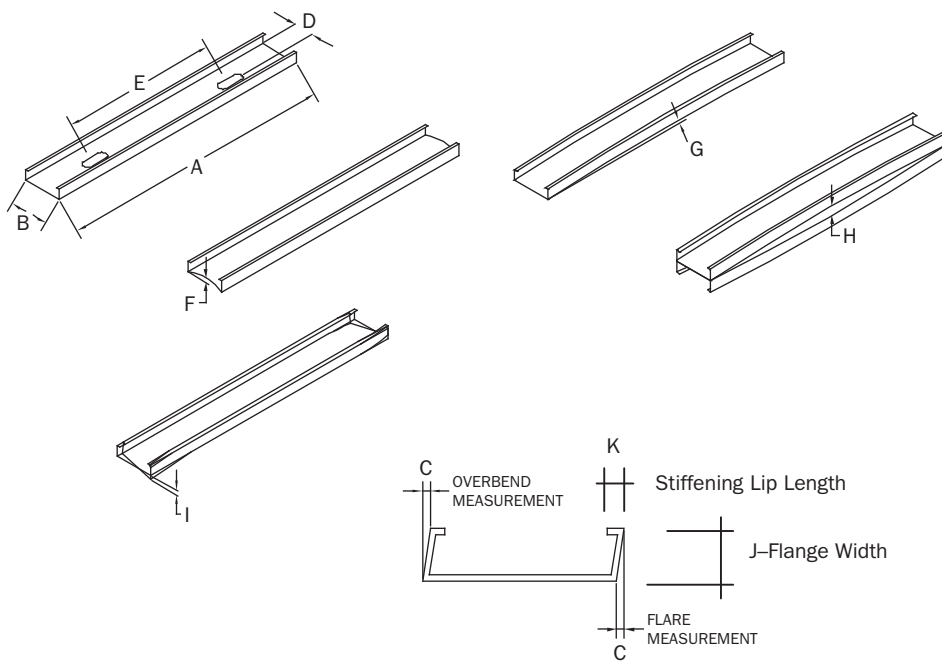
Manufacturing tolerances.^{1.400,1.432}
